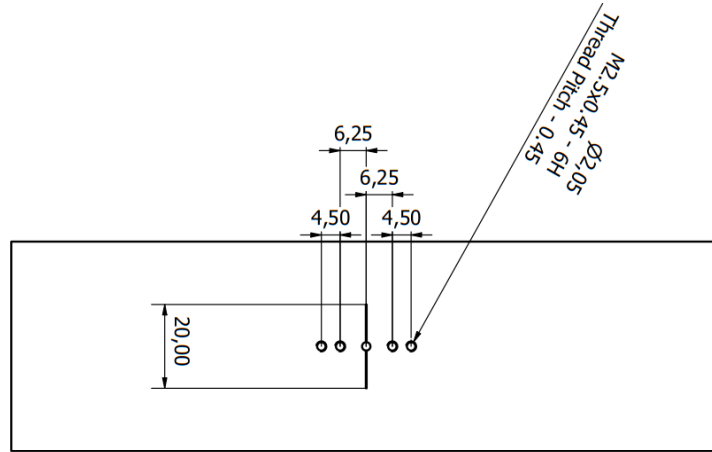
3PB specimen with holes for the knife edge attachment
